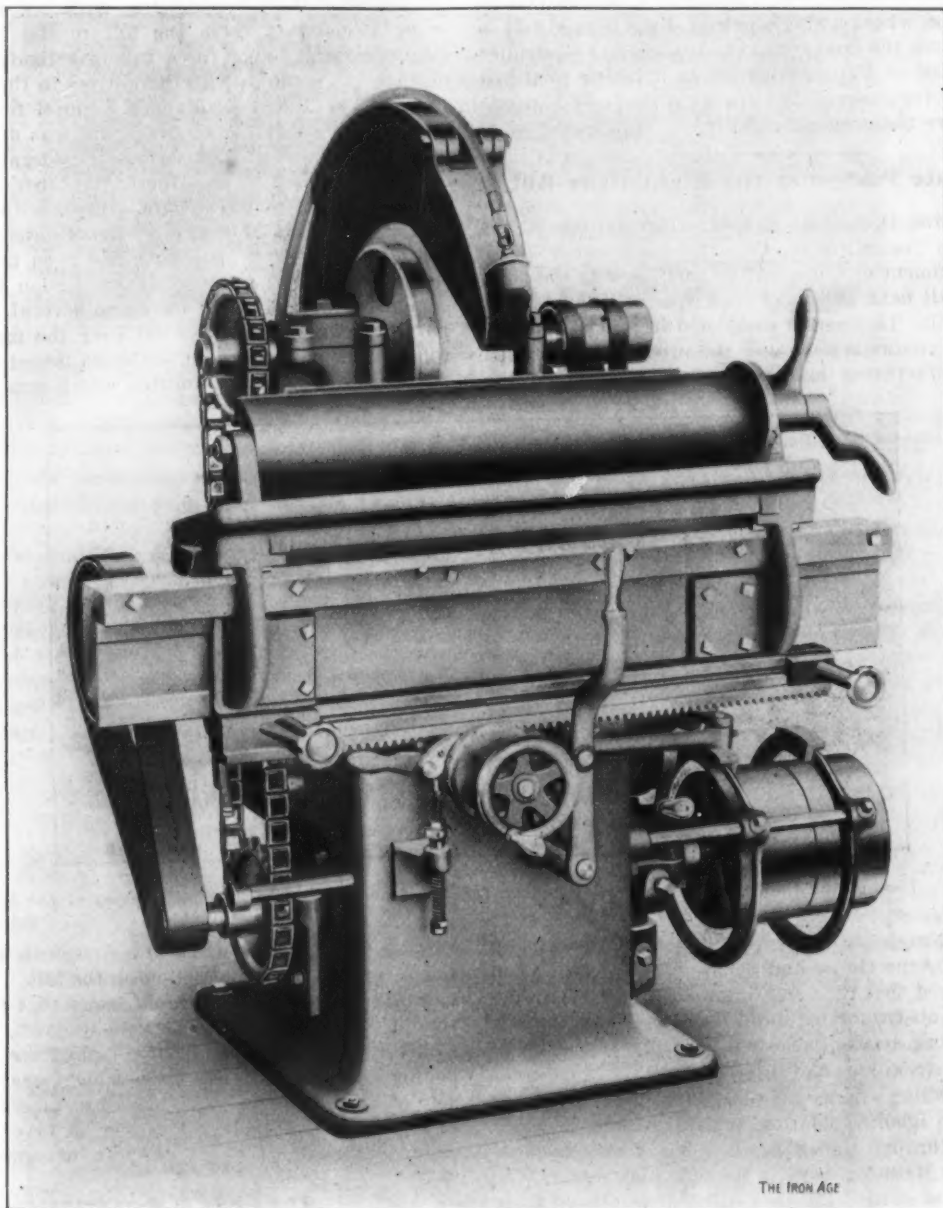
Front View of a New Automatic Machine for Grinding Wood Planer Knives, &c.
